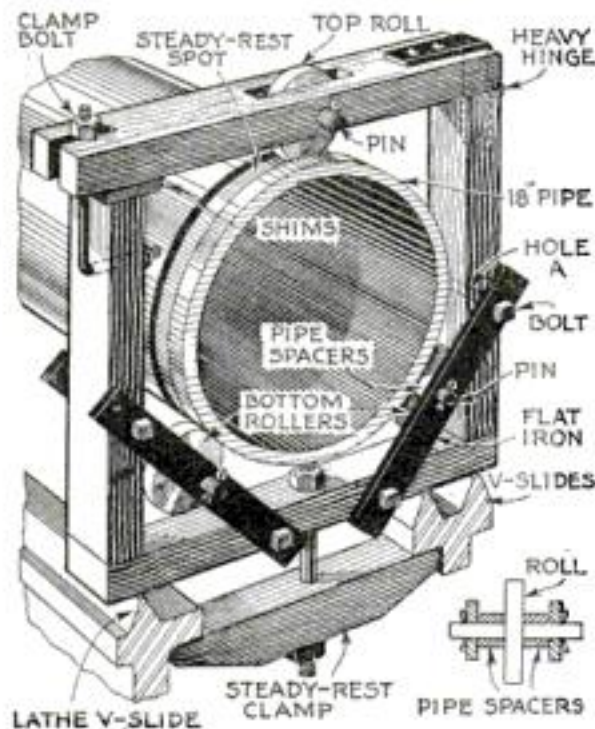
Steady rest built cheaply and quickly of wood to hold a large pipe for boring the end.
